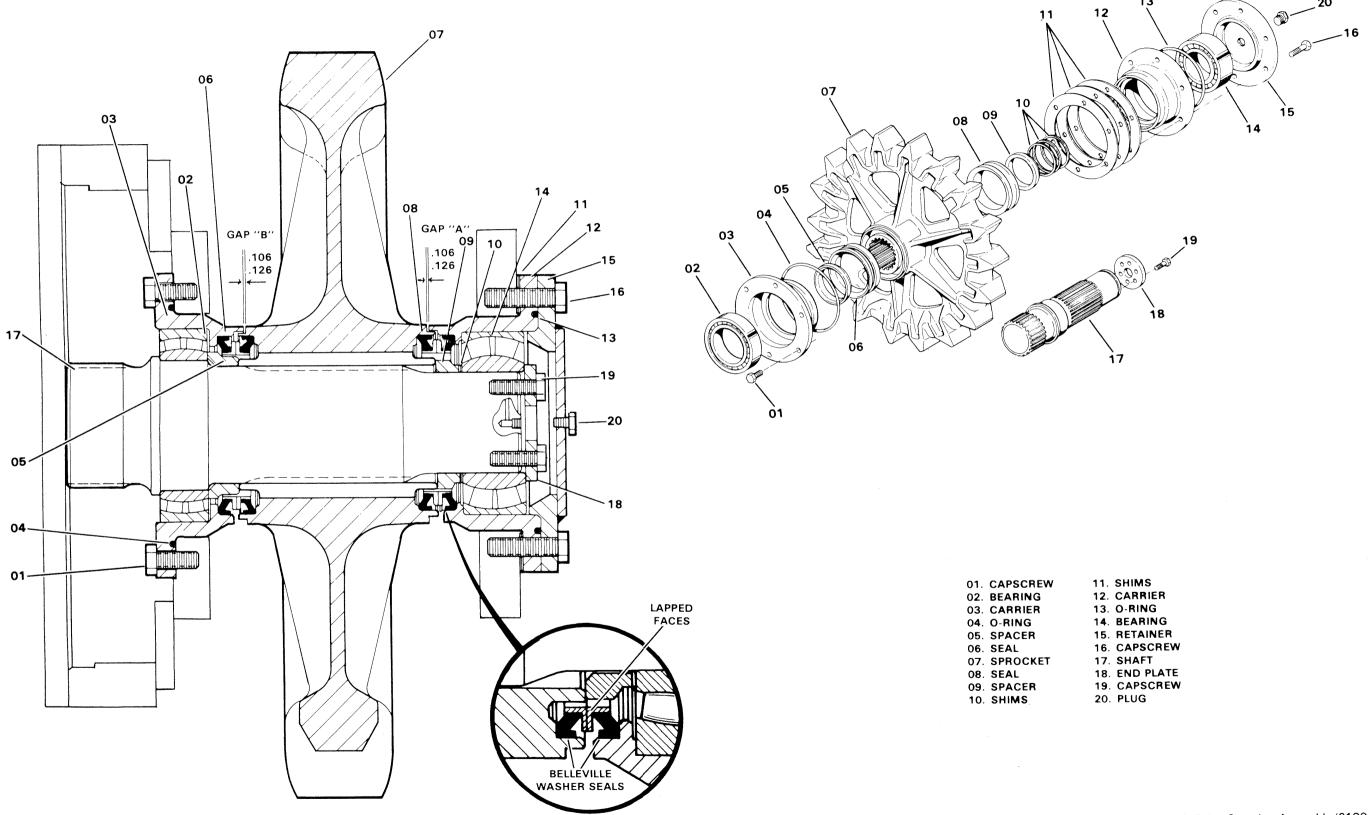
E-4. Drive Sprocket Assembly (2100J969)
